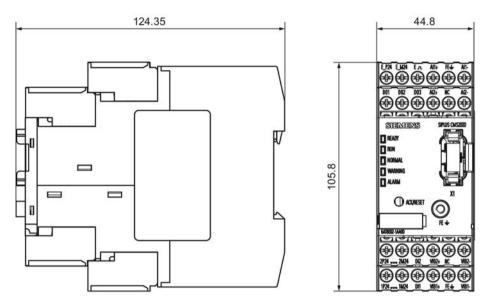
Dimension drawing SIPLUS CMS2000 Basic Unit VIB
